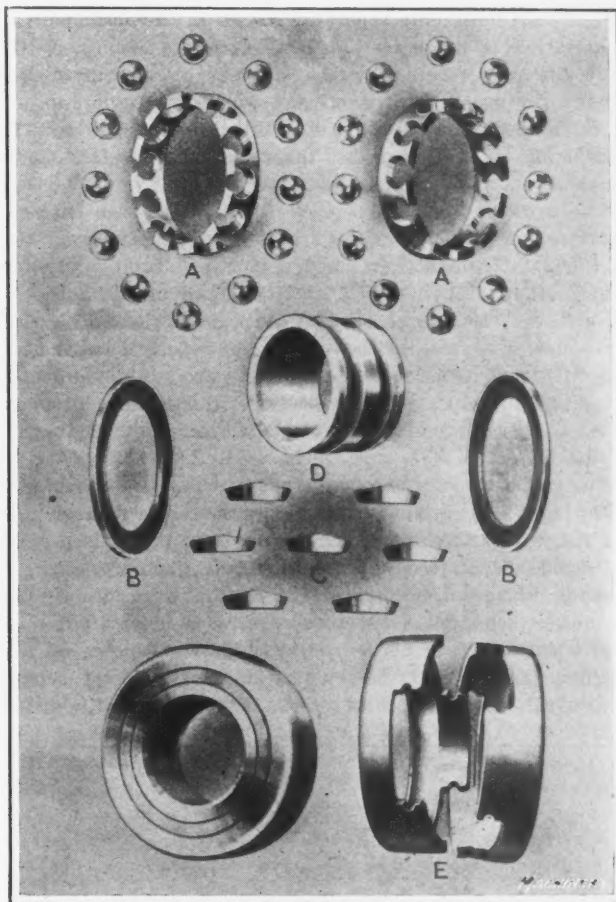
Parts of Ball Bearing shown in Fig. 1
